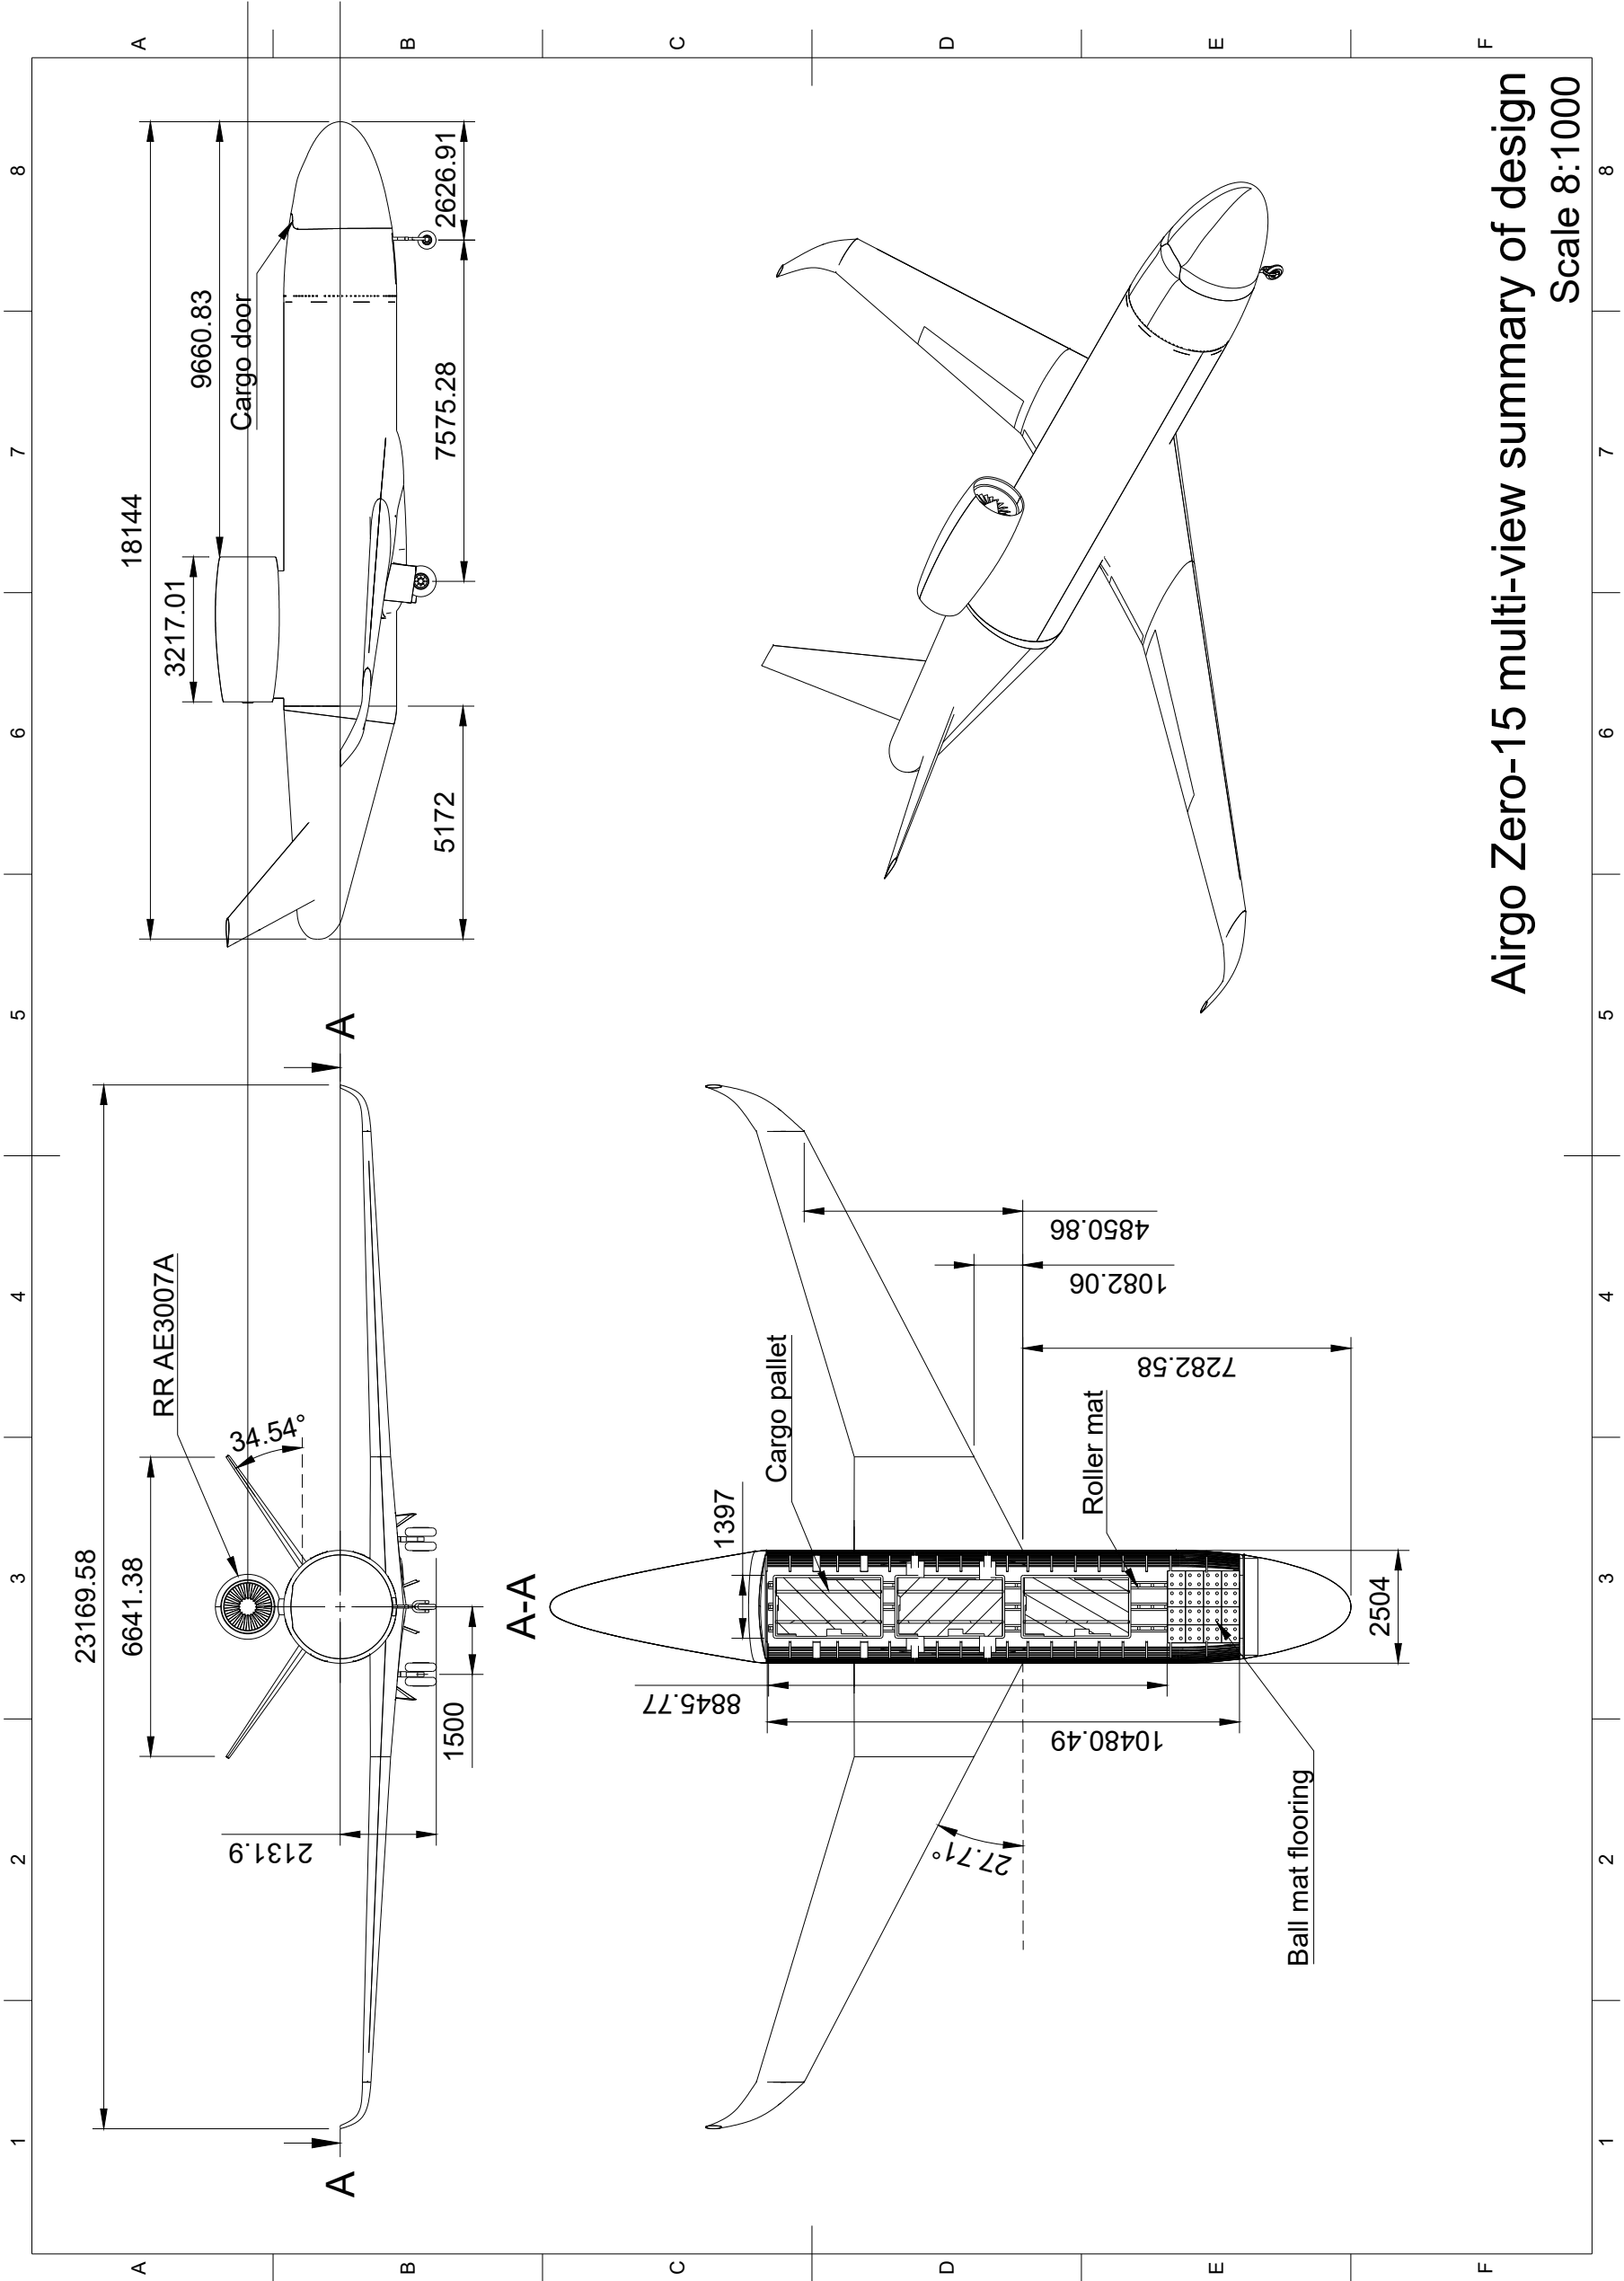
Technical drawing summarizing the aircraft's primary dimensions, including isometric view
